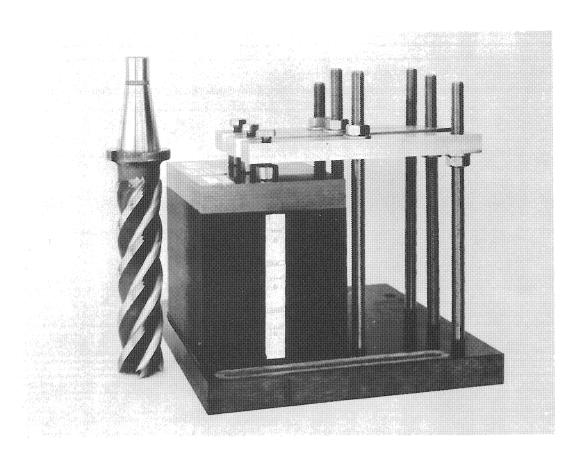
Photograph of clamped emulsion stack with special milling cutter.
